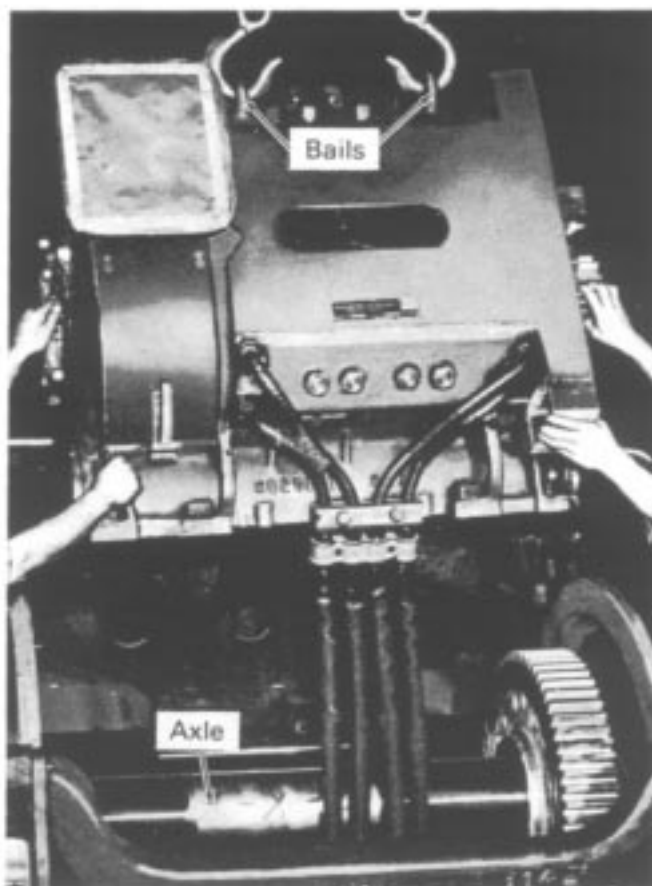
Installing Wheels, Axle, And Motor Assembly
